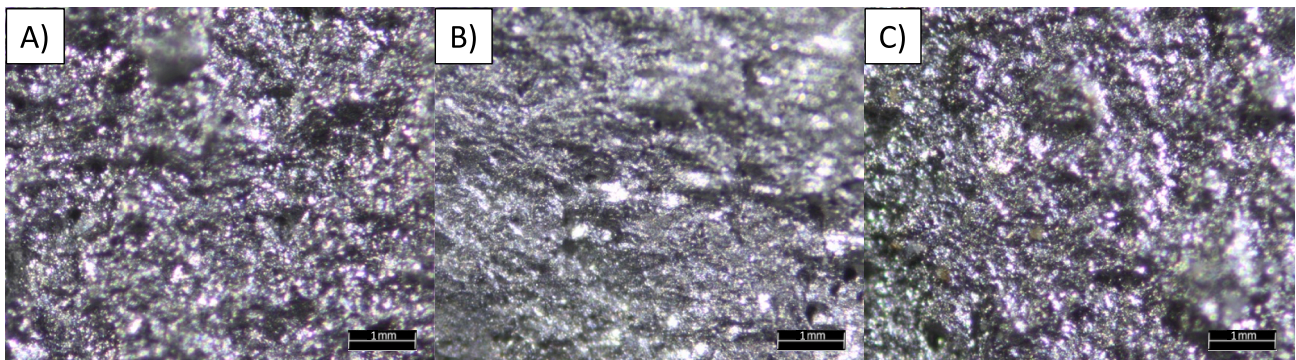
Fractography of the CT specimens A) 0°, B) 45° and C) 90°.
